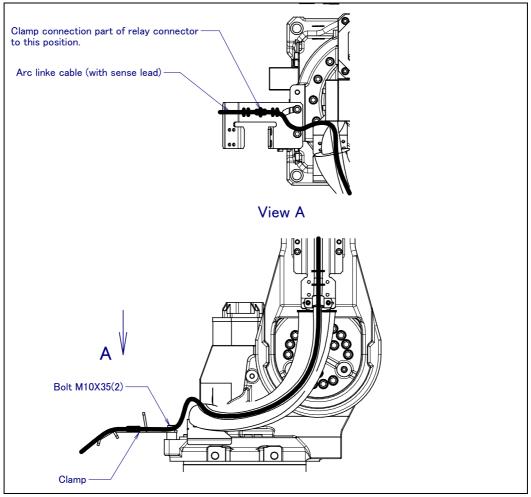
(I) Connection of ROBOWELD iC/H2 (PowerWave 455M/STT) (5/5)
